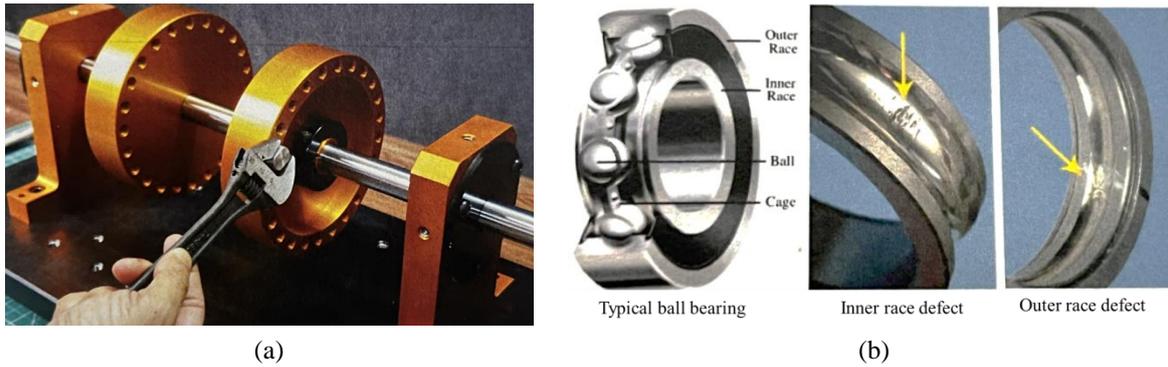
Various faults in the rotating shaft-disc assembly (a) unbalance (b) faulty ball bearing with pre-crack at inner race.
